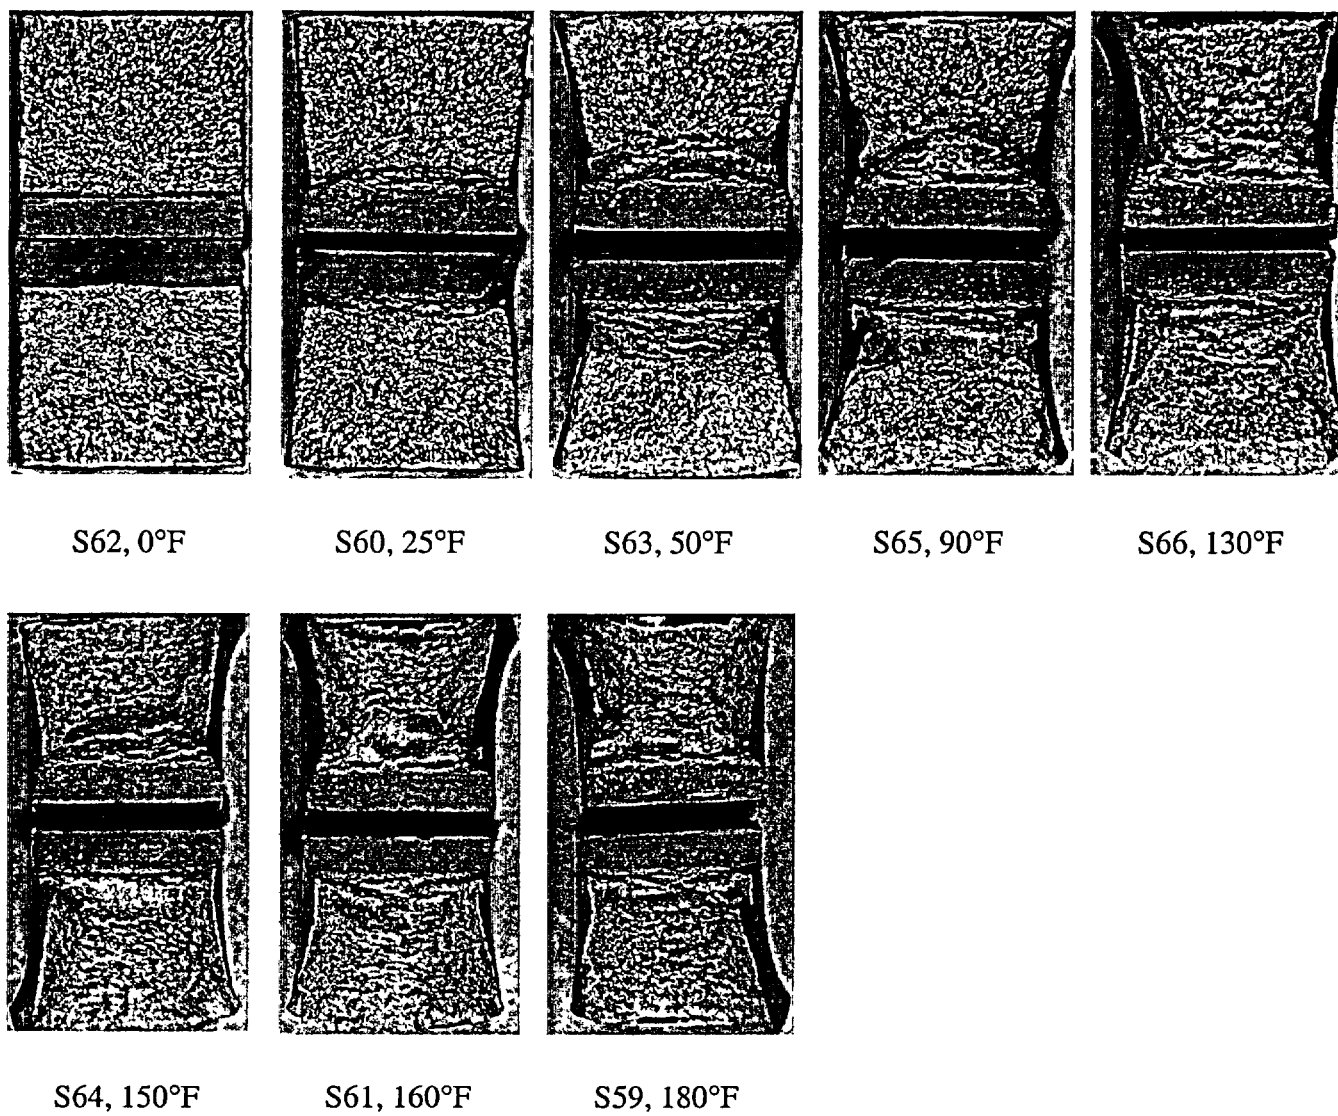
Charpy Impact Specimen Fracture Surfaces for Turkey Point Unit 3 Reactor Vessel Forging 123S266VA1 (Tangential Orientation)
